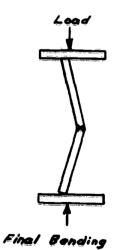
NETHOD OF LOADING FREE BEND BUTT WELD SPECIMENS
